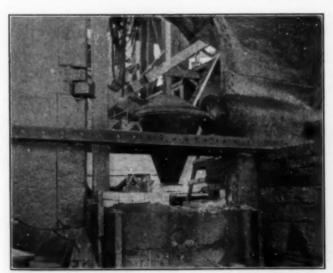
VIEW AFTER COMPLETION OF SECOND WELD.
